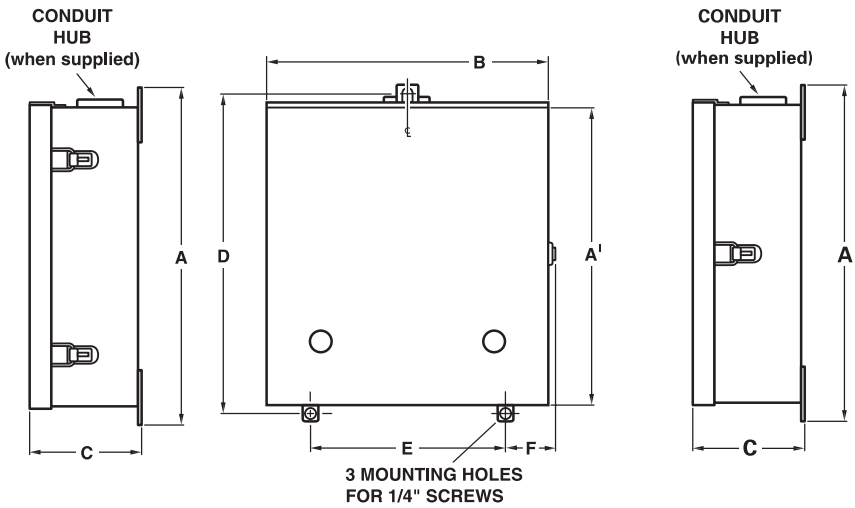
, CR160MC Type 12, 4/4X 3-point Mounting
